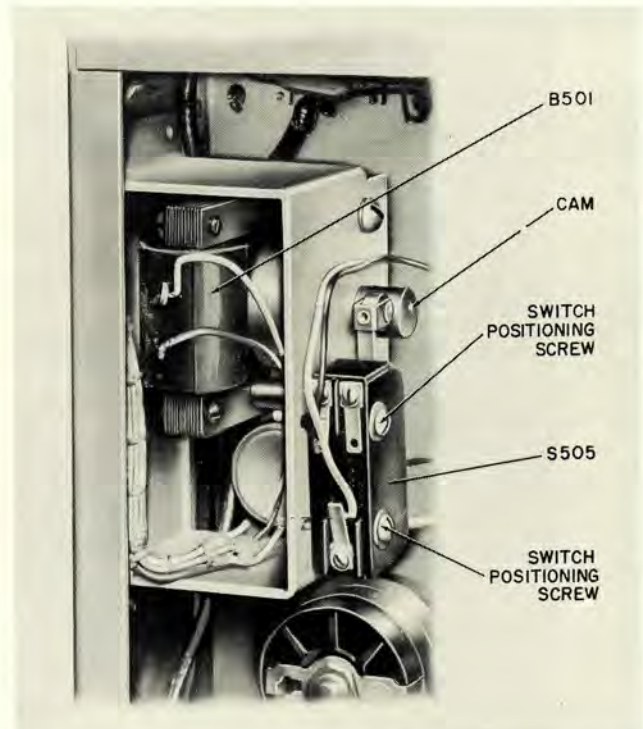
Time Delay Type TD-92/FPN-30, Close-up of Blink Motor Assembly
